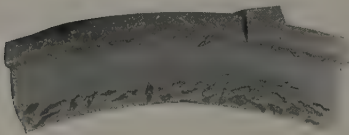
Truing Up Brake Shoe. American Abrasive Metals Company.
